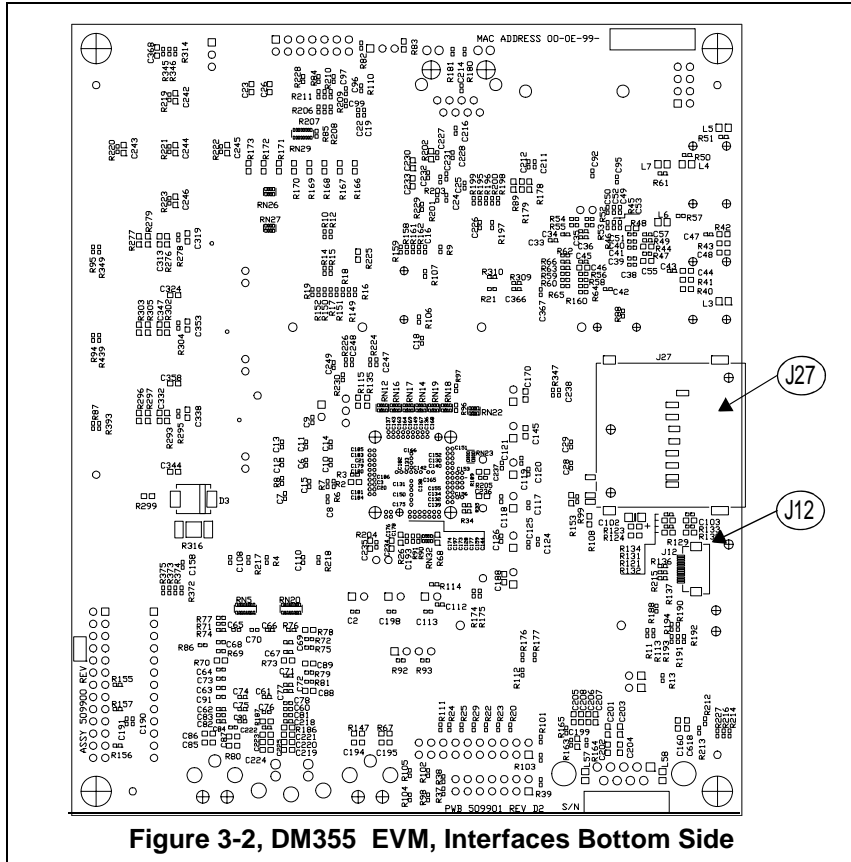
, DM355 EVM, Interfaces Bottom Side
